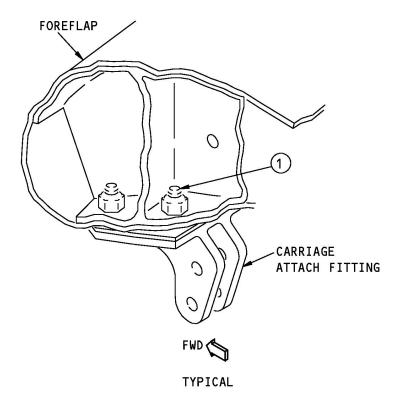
REWORK OF LUG ASSEMBLY (SHEET 2 OF 3)
